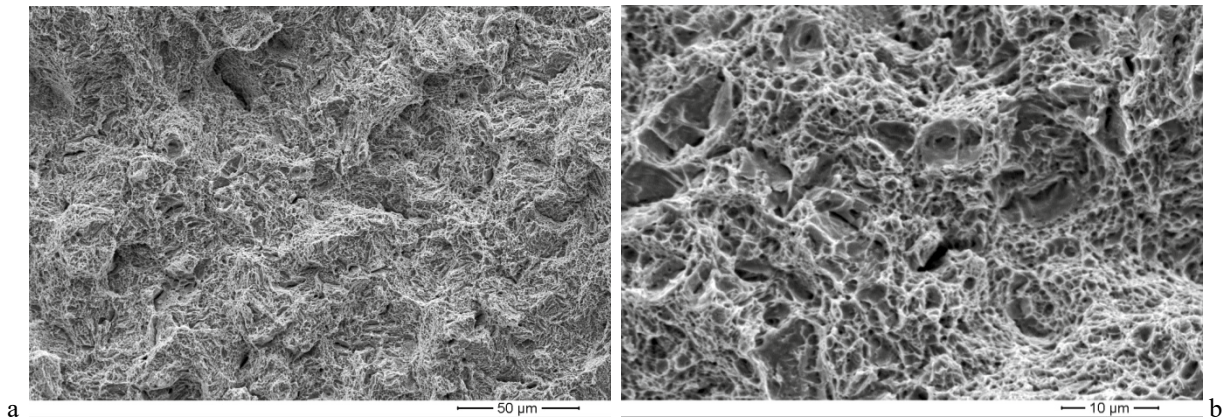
Fracture surface of a tensile specimen tempered at 440 °C . Electron microscopy. Central (normal) part. Ductile fracture (a, b).
